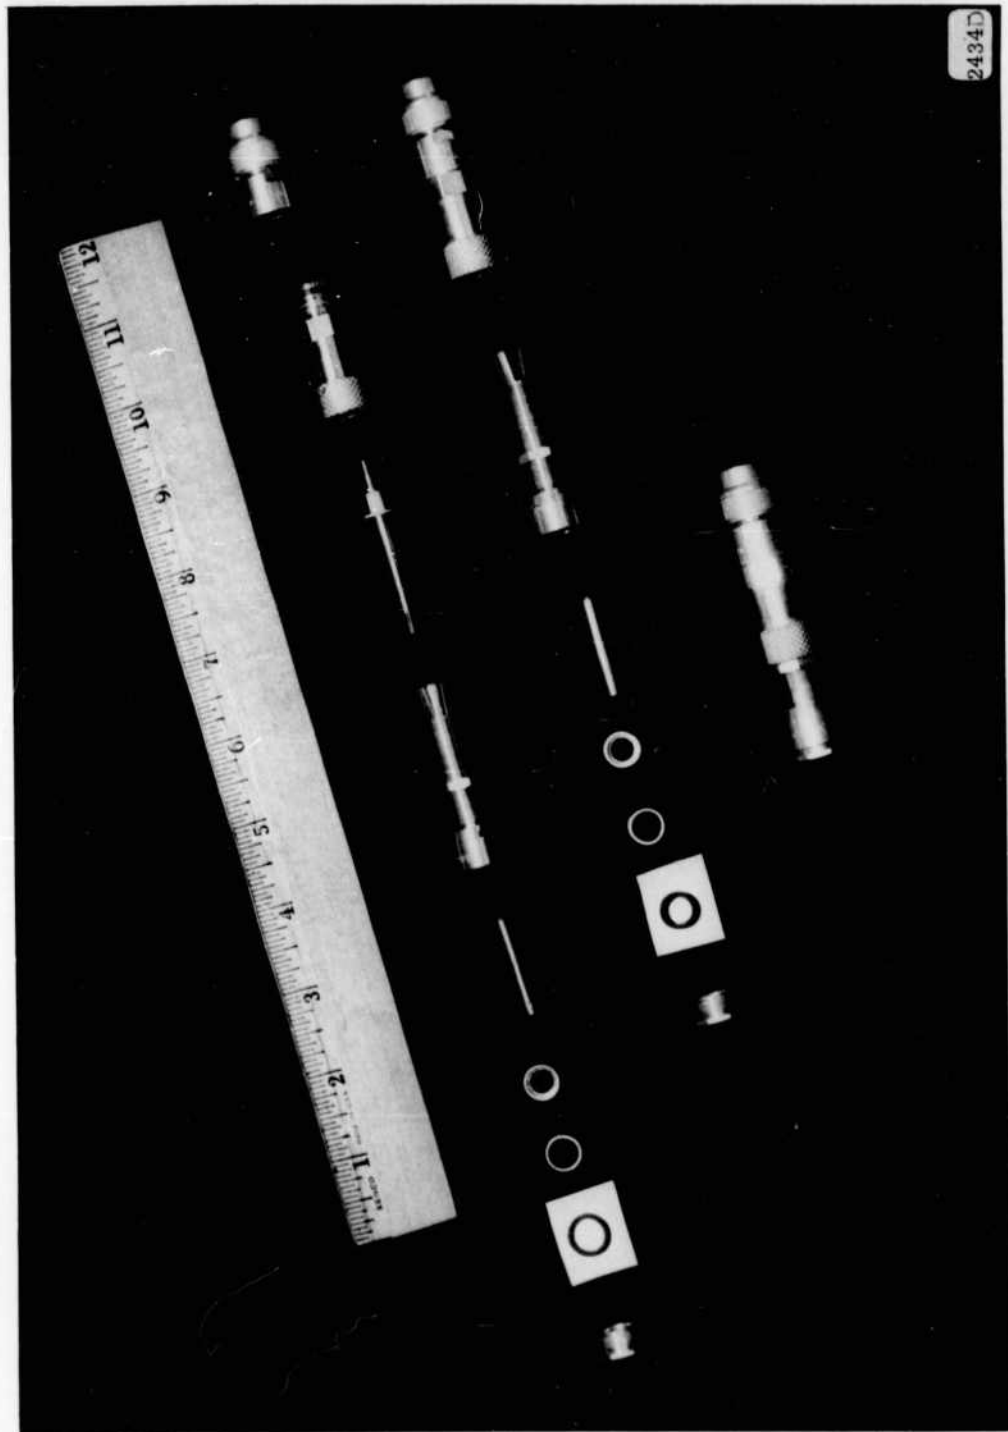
Assembled And Exploded Views of Special Connector And Phasing Section
